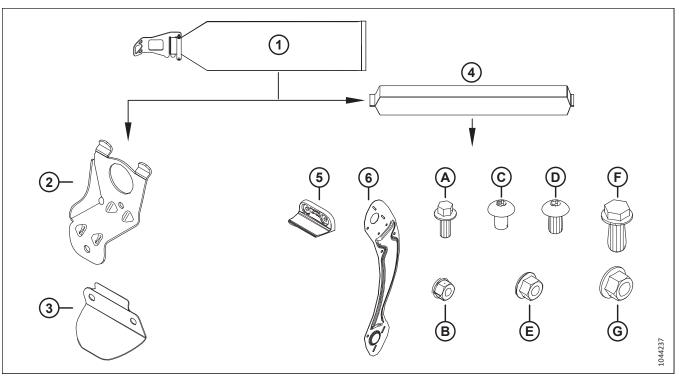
Parts Retrieved from Reel Endshield Parts Bag (MD #368325)
